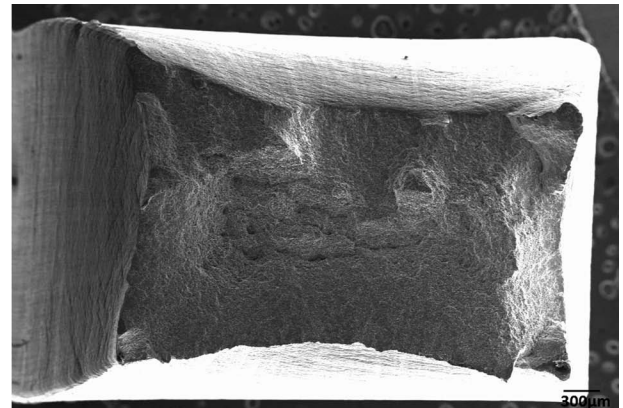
Fracture surface of a room temperature tensile-tested AA 3003 specimen tested in longitudinal direction taken at low magnification
